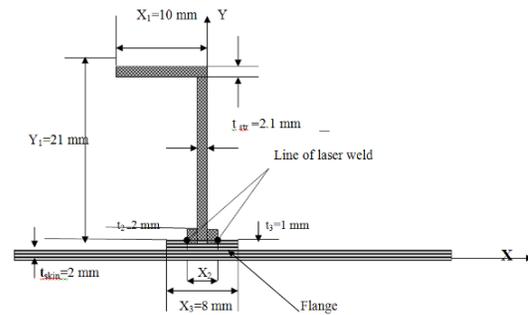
The sizes and attachment of a stringer by Laser welding.
